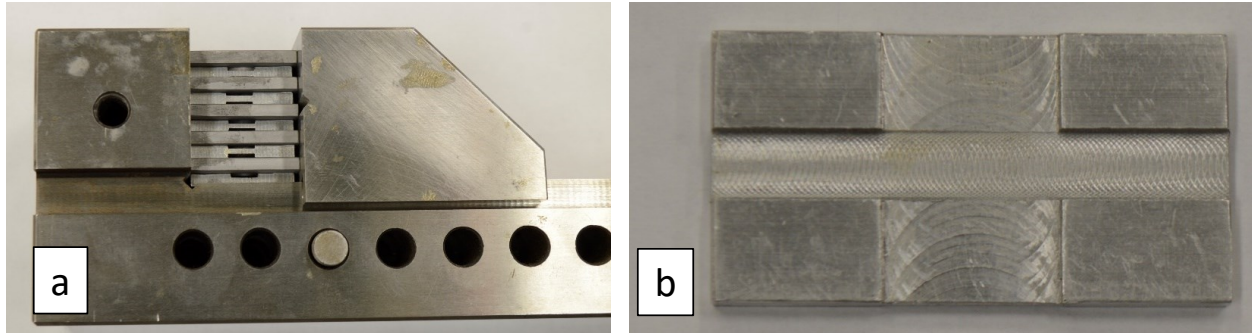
Bonded shear specimens in vice (a), separated by spacers (b)
